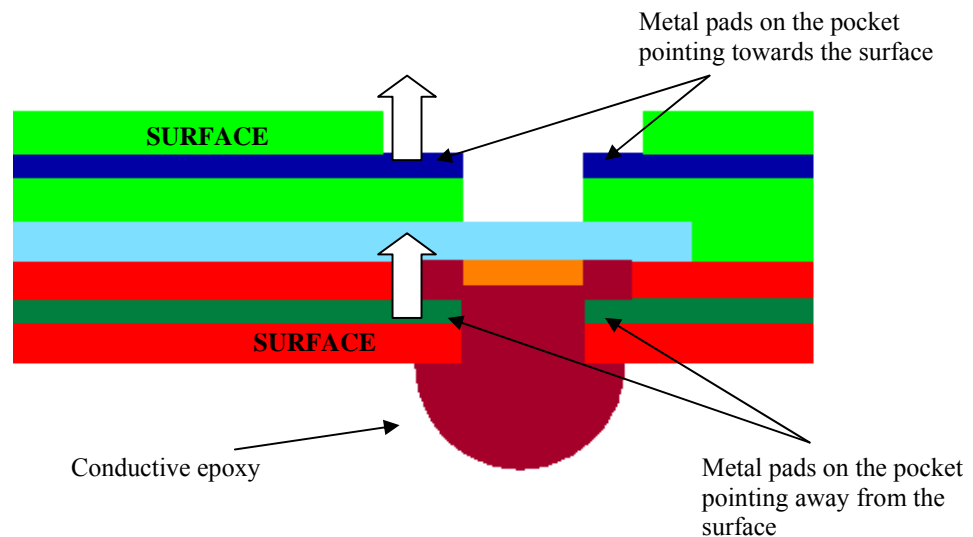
Current metal bonding pad orientation; the metal pads on the bottom layer point away from the bottom surface.
